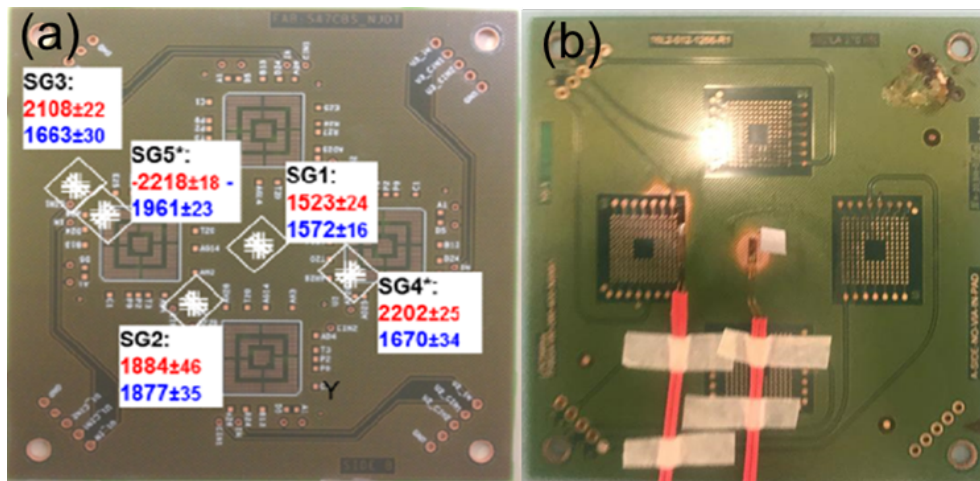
B111A PCB layout (a) strain value drop test [37] (b) PCB used in this thesis
